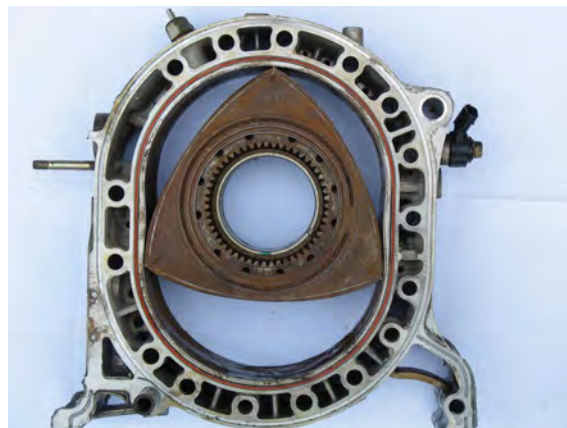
Photo of flat oval rotary piston and flat oval surface of the cylinder used in combustion engine 1.3 Wankel 13B Renesis 147 kW produced between years 2003-2010 [10] and used in the Mazda RX-8 passenger car
